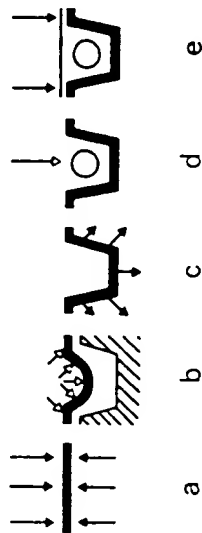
The steps in making thermoforms. (a) Heating; (b) forming; (c) filling; (d) cooling; (e) sealing.
